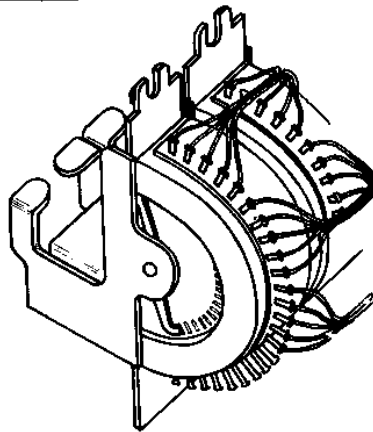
UNISELECTOR MULTIPLE WIRING.
